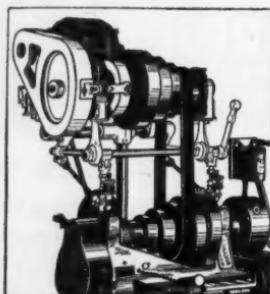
View of Oilgear Cyclematic Broaching Machine, Showing Tools Entering Work
